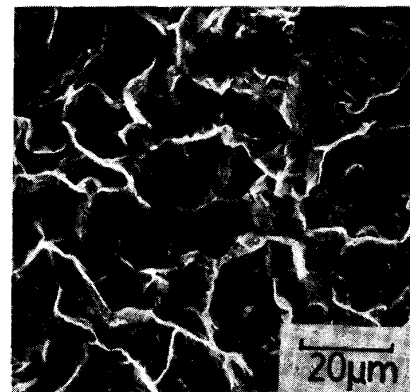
Example of Fatigue Fracture Surface (0.3mm from the surface)
